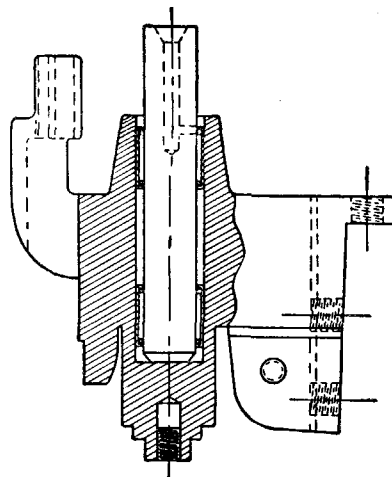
A hole along the axis of the shaft with a cross hole opening under the lip of the upper bearing provides lubrication to the Needle Bearings in this textile machine spindle swing bracket.
